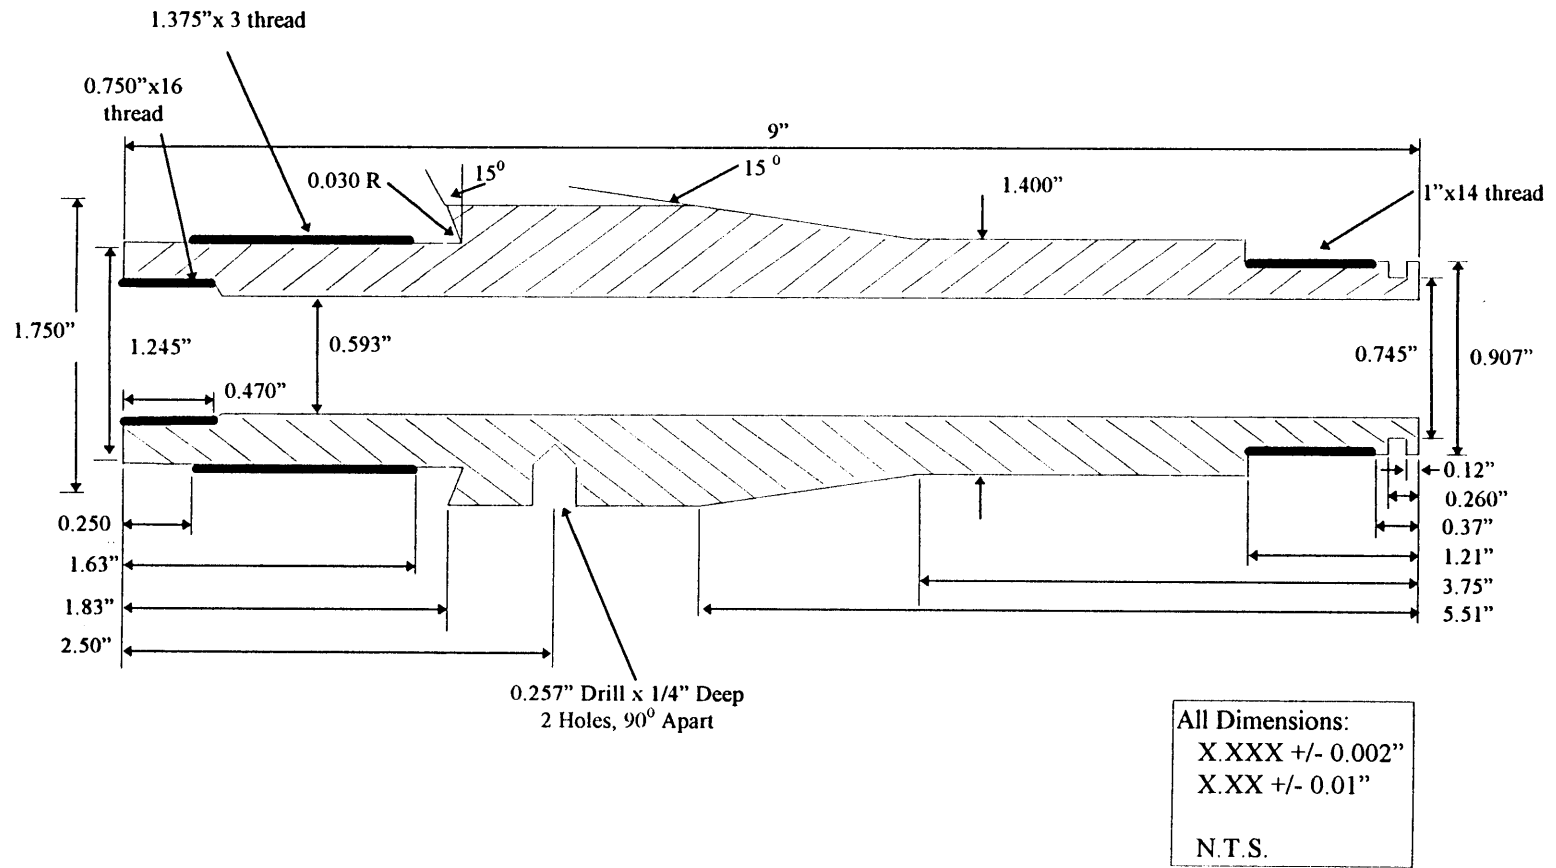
Schematic of Housings used to Couple the MIT Piezocone to Standard AW Drill Rod.
